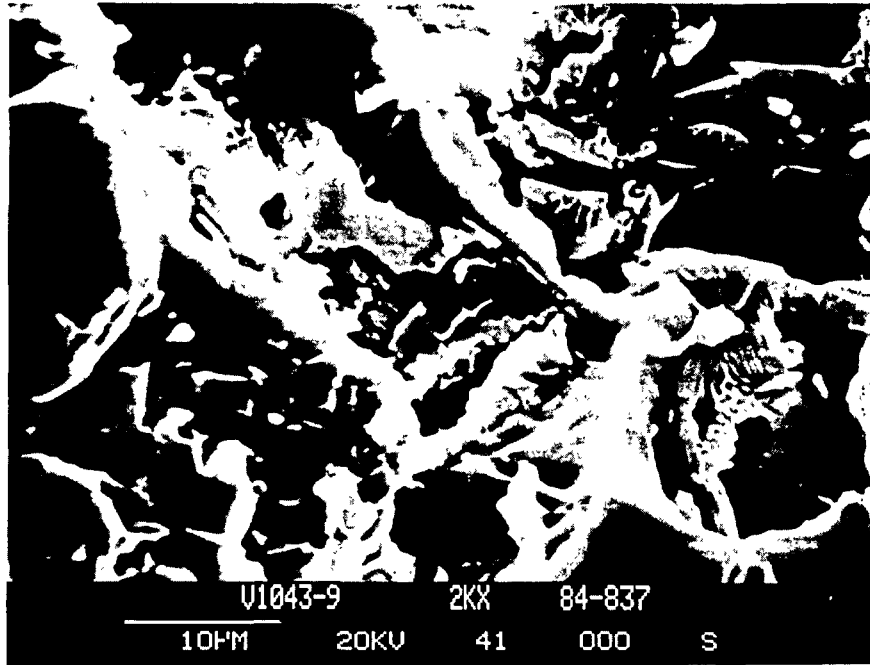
Dimple rupture fracture surface with large eutectic colony particle retained in the large dimple.
